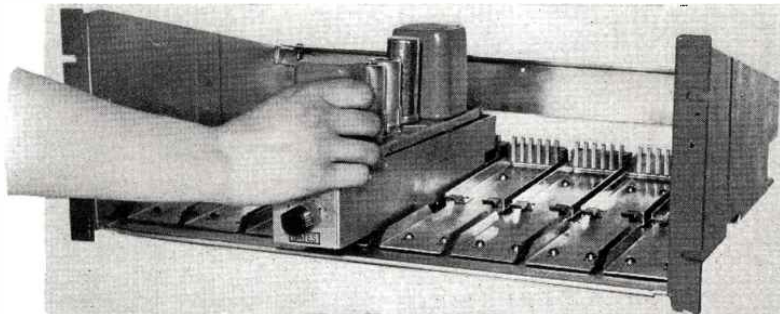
HOW THE FRAME CHASSIS FITS OVER THE BASE PLATE AND IS SECURED BY BRONZE CLIPS
